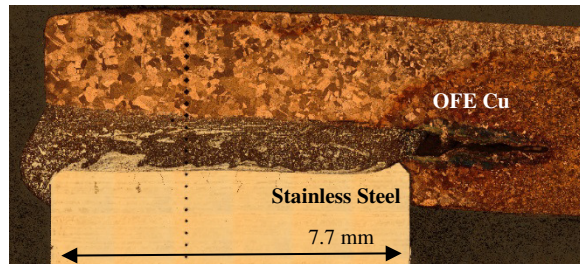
E-beam weld of stainless to OFE copper.
